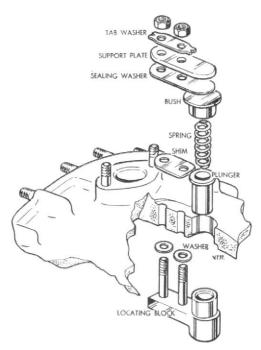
Spring-loaded plunger assembly, mod. 743, 987, and 1113.
